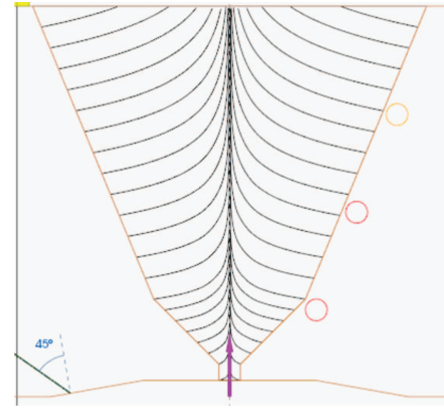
Double bevel weld with three side-drilled holes with map orientation described with Ogilvy.
